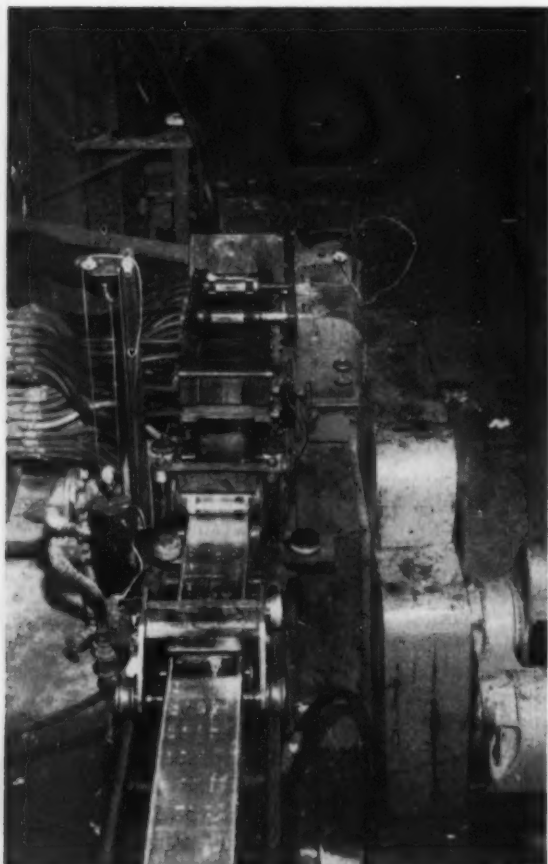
Bar exit end of casting machine. Holding furnace and molten metal launders at top left. Guide rolls and flying shear in foreground. Casting speeds: 4 to 15 ft. per min.
